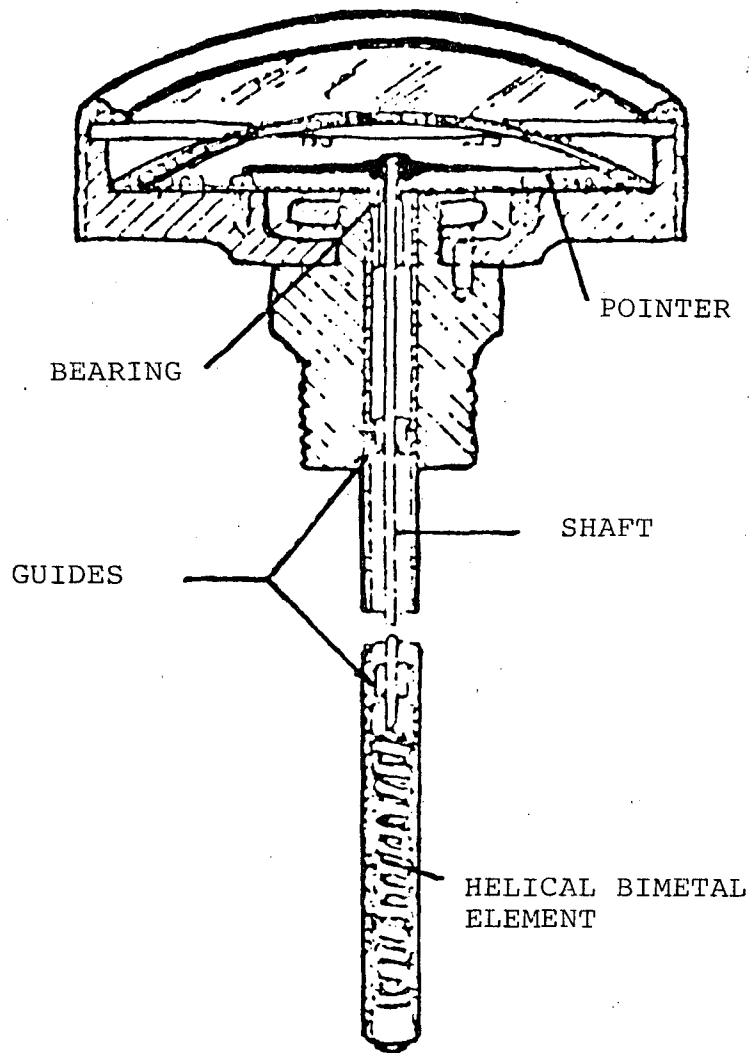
SECTIONAL VIEW OF AN INDUSTRIAL THERMOMETER USING A HELICAL-TYPE BIMETAL ELEMENT.
